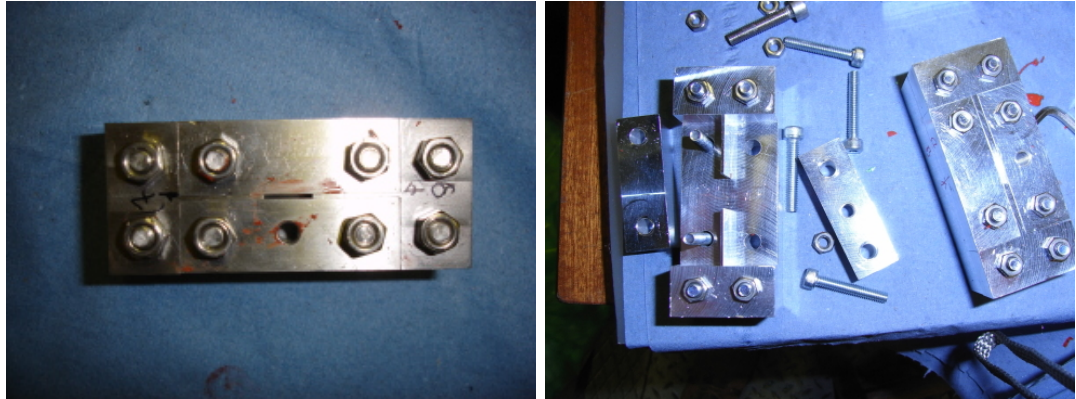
The moulds used to create the C1 axial pads. The left hand panel shows a fully assembled mould and the right hand panel shows both an open and complete mould. The RTV560 is forced into the mould through a needle to the bottom of the mould. The top is left open and the excess removed with a razor blade.
